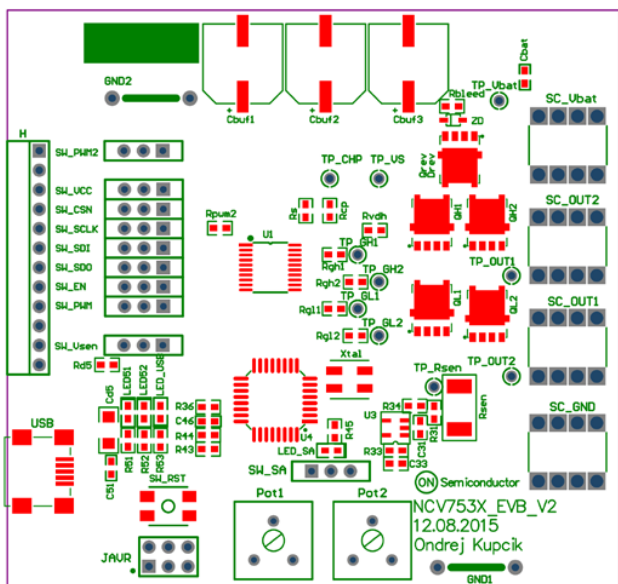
NCV7535 EVB PCB Top Assembly Drawing
